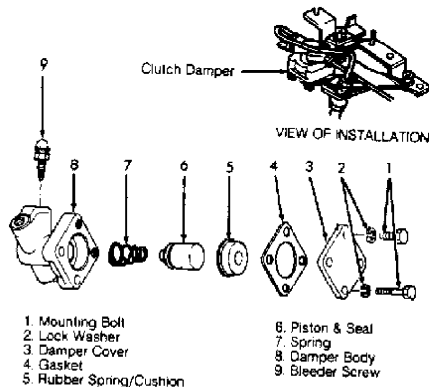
Exploded View of Damper Unit (MPV 4-Cylinder)
